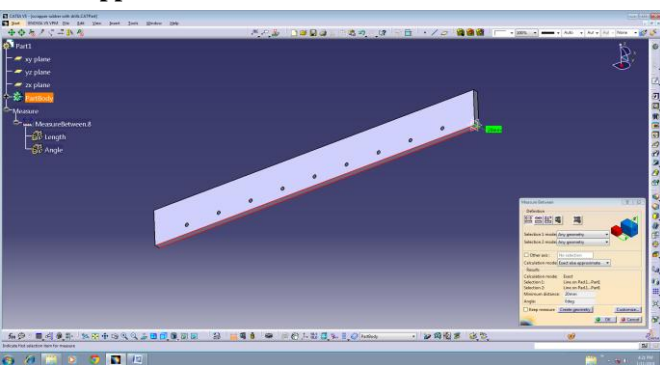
General Arrangement Drawings of Scraper Rubber
